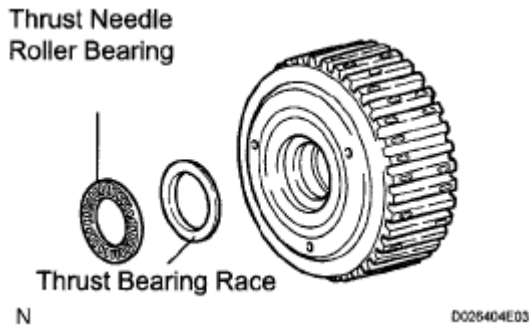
Identifying Thrust Needle Roller Bearing And Thrust Bearing Race
